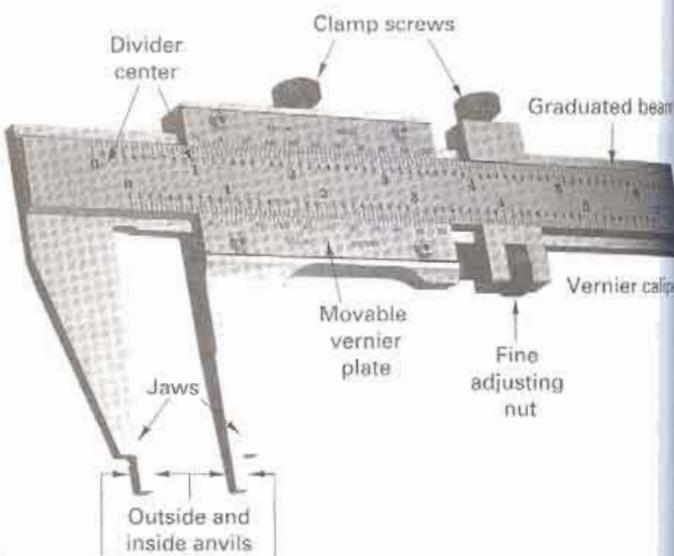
This vernier caliper can make measurements using both inside (for holes) and outside (shafts) anvils.
